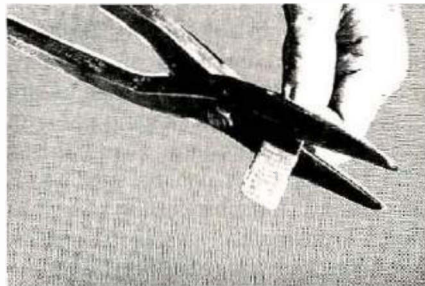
Now chop the strip down to half-inch pieces, left, and solder the lowest copper pad directly to the baseboard. Use a 35-watt, or larger, soldering iron.
